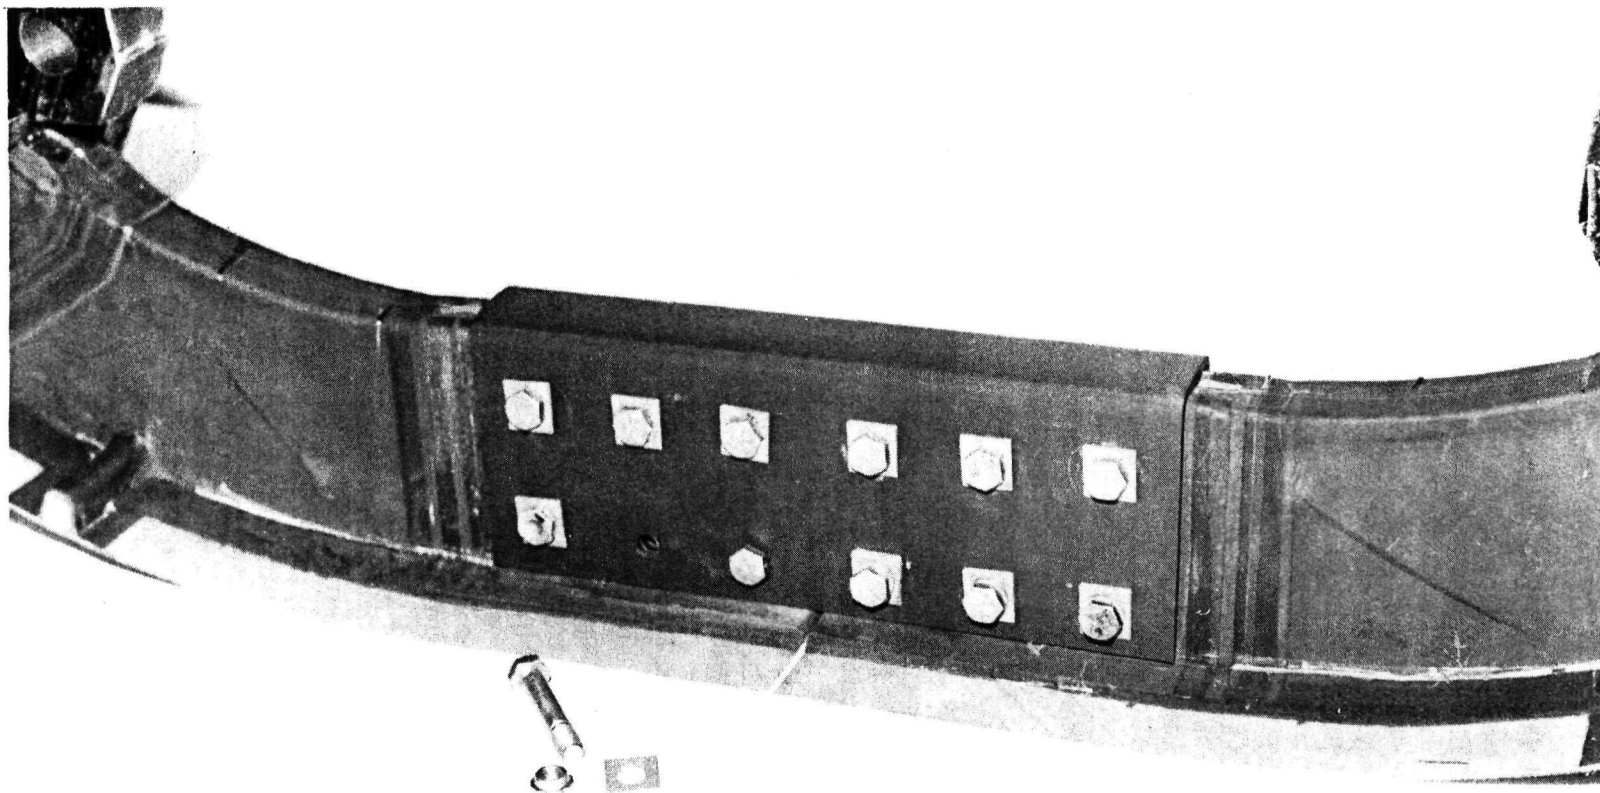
EWR 39411-113 COMPOSITE SPLICE CHANNEL INSTALLED ON EWR 32381 FRAME SPLICE JOINT SPECIMEN.
